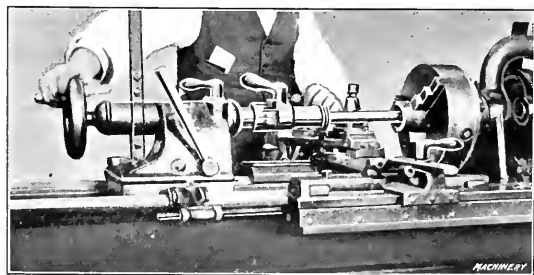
Boring-bar held in the "Satco" Drill Holder
